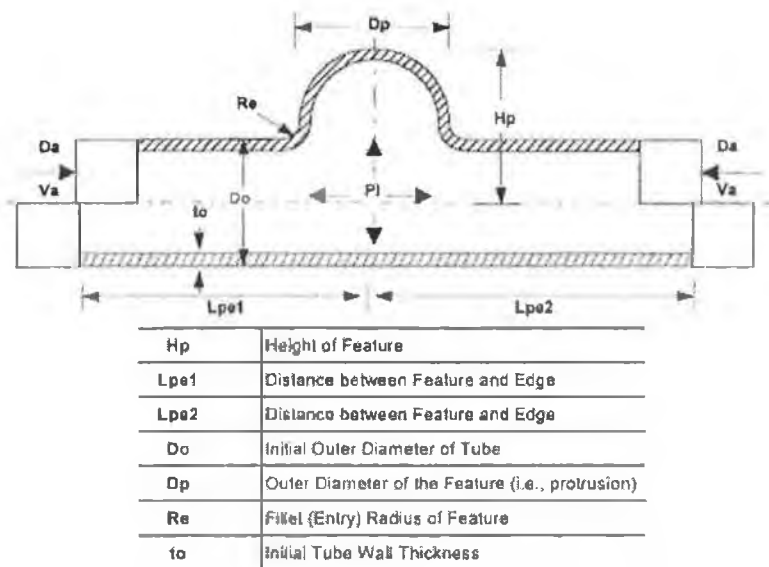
Geometrical parameters for a T-shape part in hydroforming process [50]
